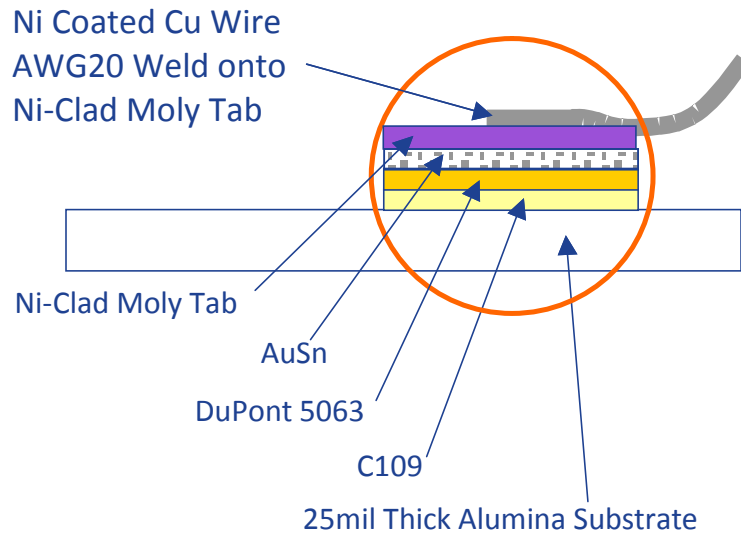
Configuration of Wire Welding Substrate
